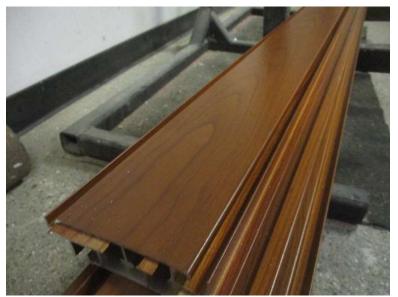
Exposed Surface of the Test Specimen (Pre-test)
